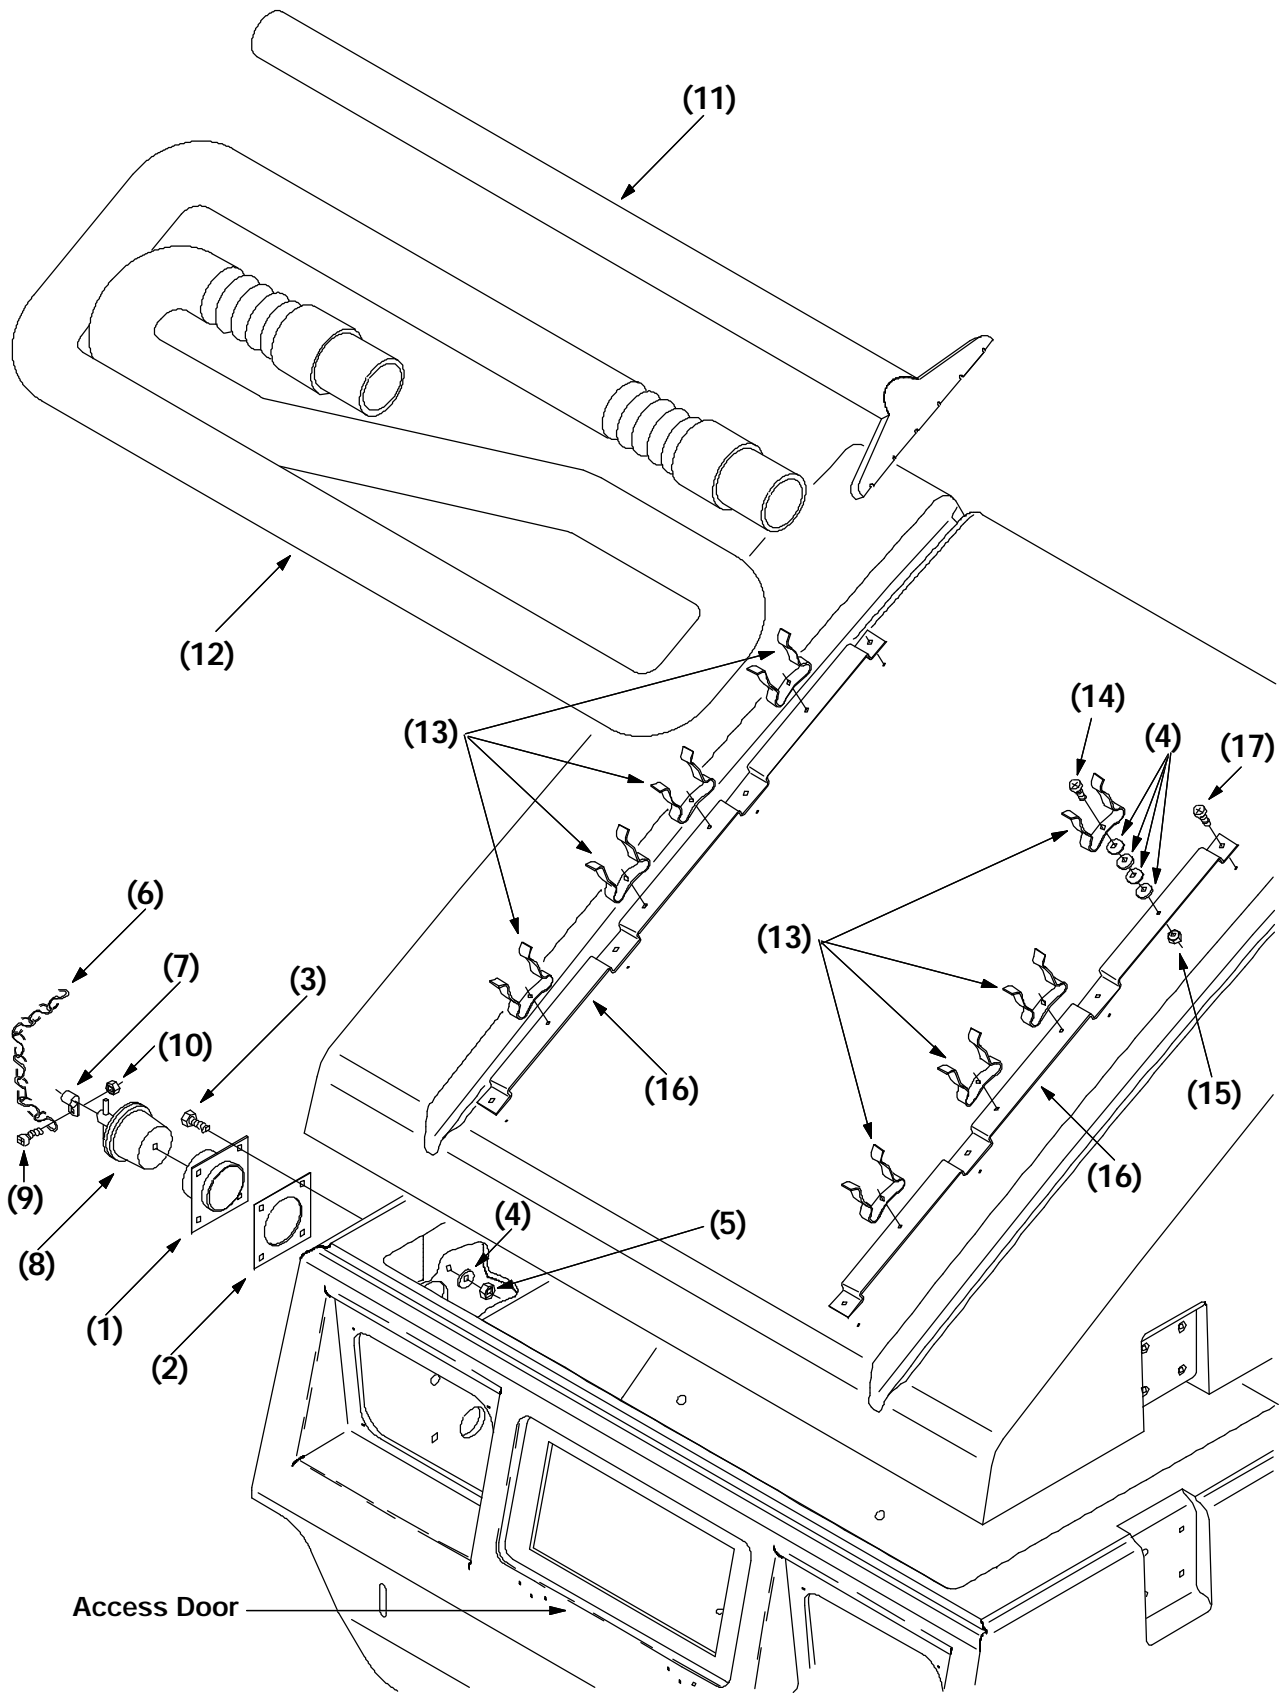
Installation of Vacuum Wand Bracket and Adaptor
